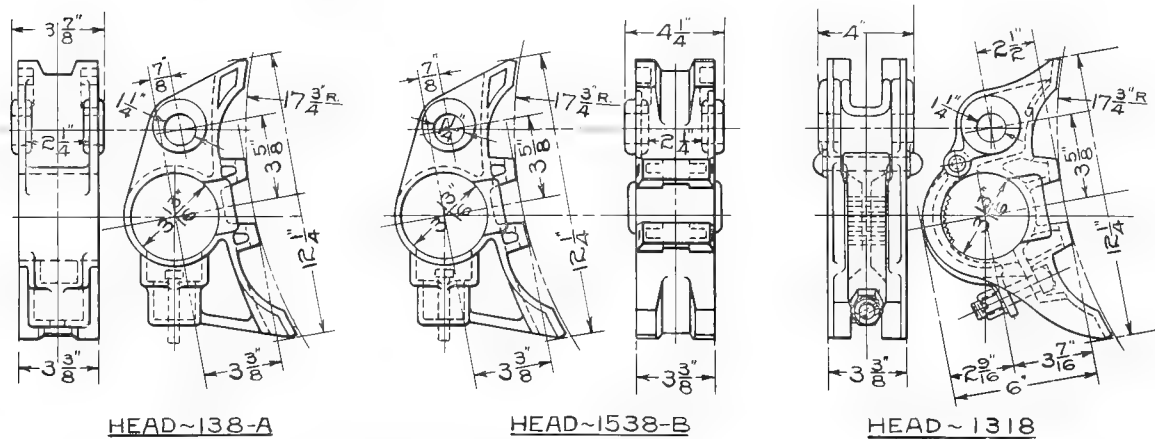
Creco Standard Adjustable Brake Heads. Chicago Railway Equipment Company.
